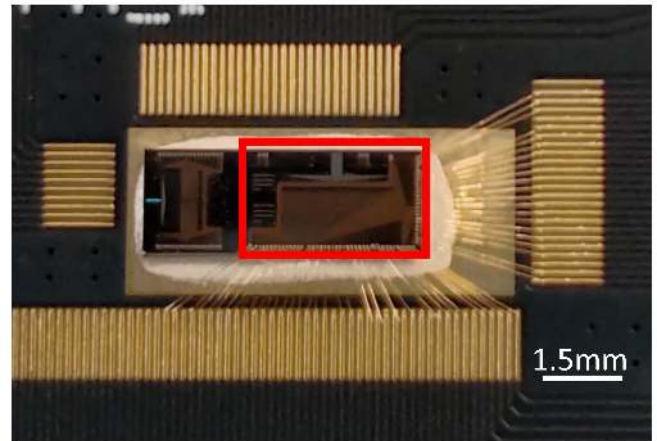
Optical image of the fabricated OPA mounted on a PCB
